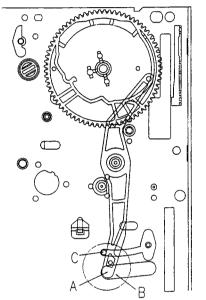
L/C BRKT, PINCH LEVER, CAM GEAR, RELAY LEVER, F/L RACK REMOVAL
